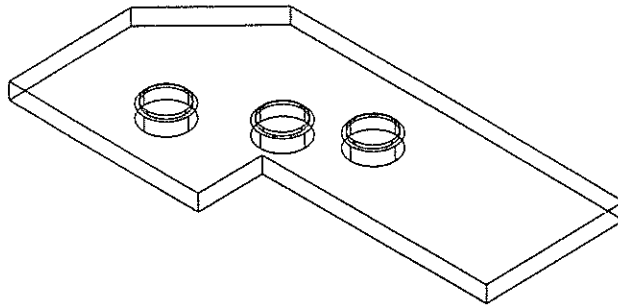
Circle extruded, concentric C'bore hole placed, and chamfer feature placed
